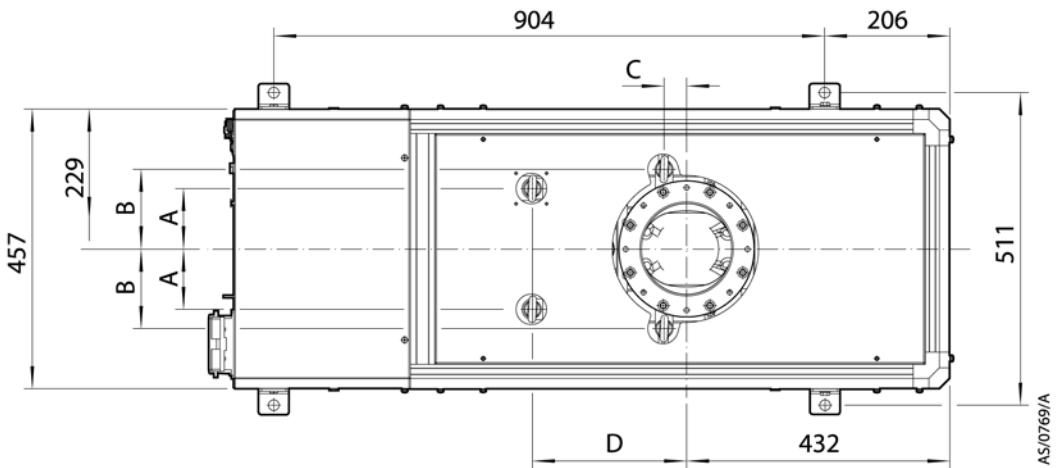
pHMB side view, including tabulated eyebolt positions - dimensions (mm)
